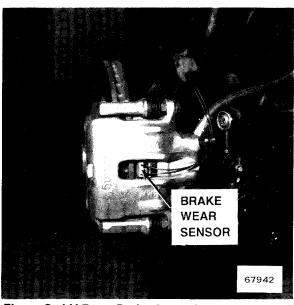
LH Front Brake Assembly (Wheel Removed)
